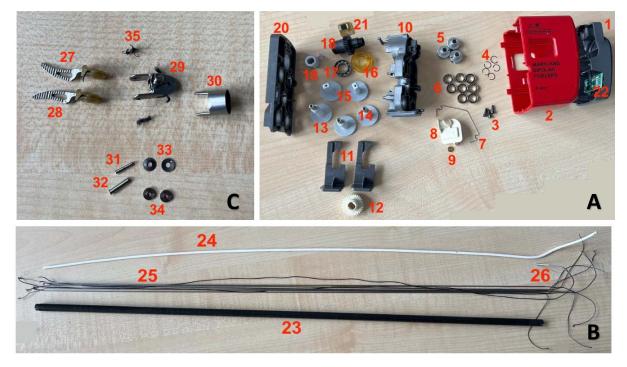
Figure E: Disassembled Sample Reposable Device. Note: A, driver assembly; B, shaft assembly; C, tip grasper assembly. Components 21, 22, and 26 relate solely to the device's bipolar function and are therefore excluded from the comparison. There were initially four units of component 34, but two were lost during the disassembly process.
